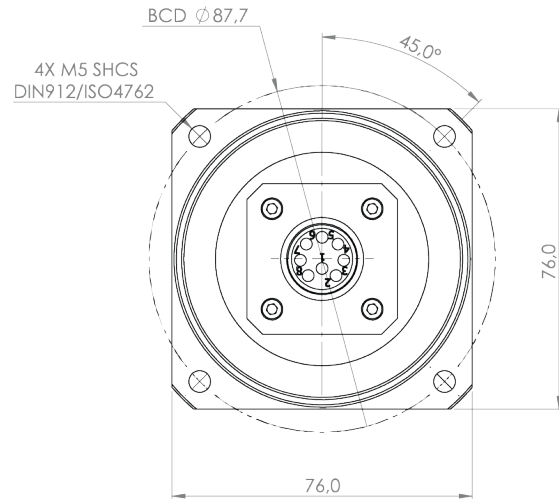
MRU Subsea / MRU Subsea H technical drawings: top view.
